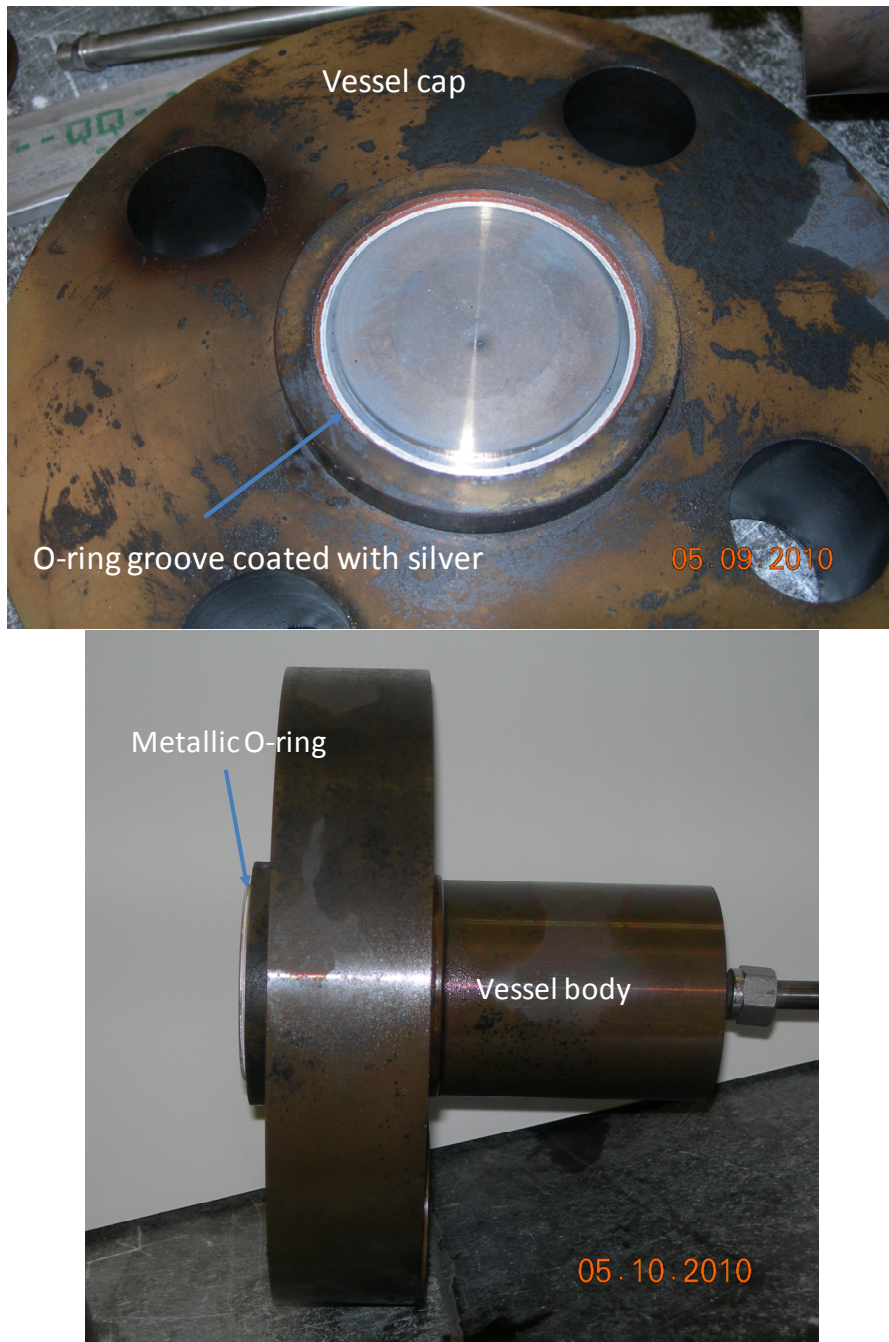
Post-test photographs showing silver from the metallic O-ring deposited on the O-ring groove (above) and the O-ring bonded to the test vessel body (below).
